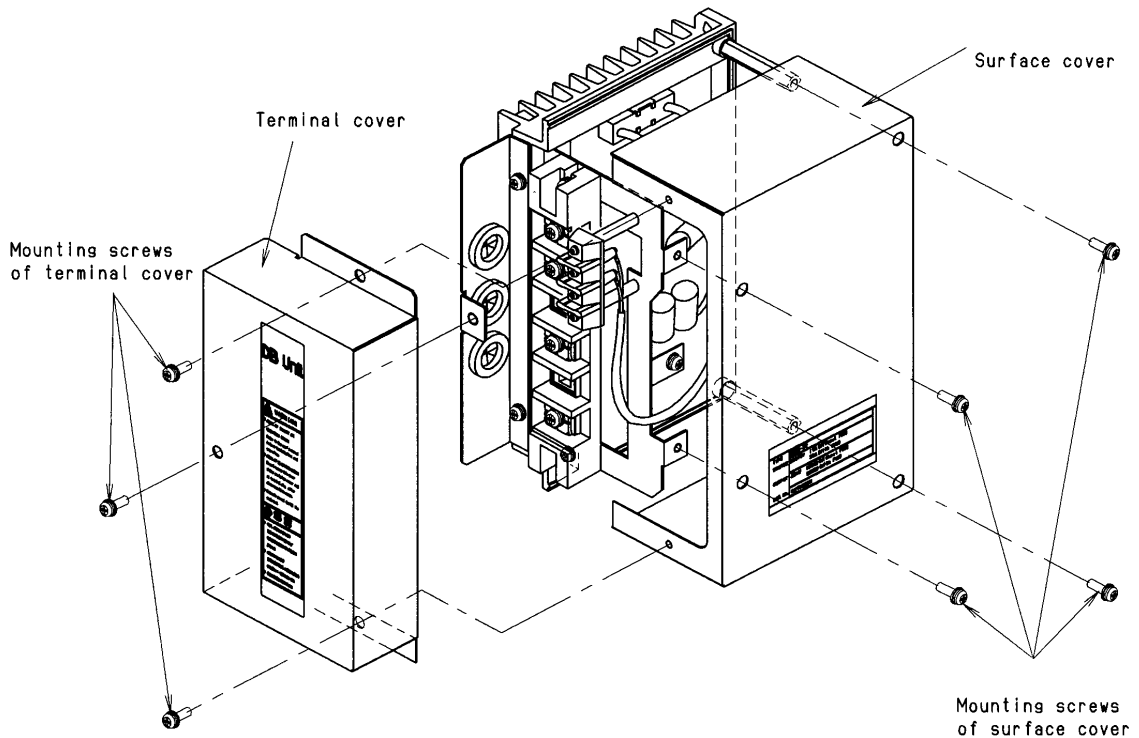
Removal of Terminal Cover and Surface Cover
